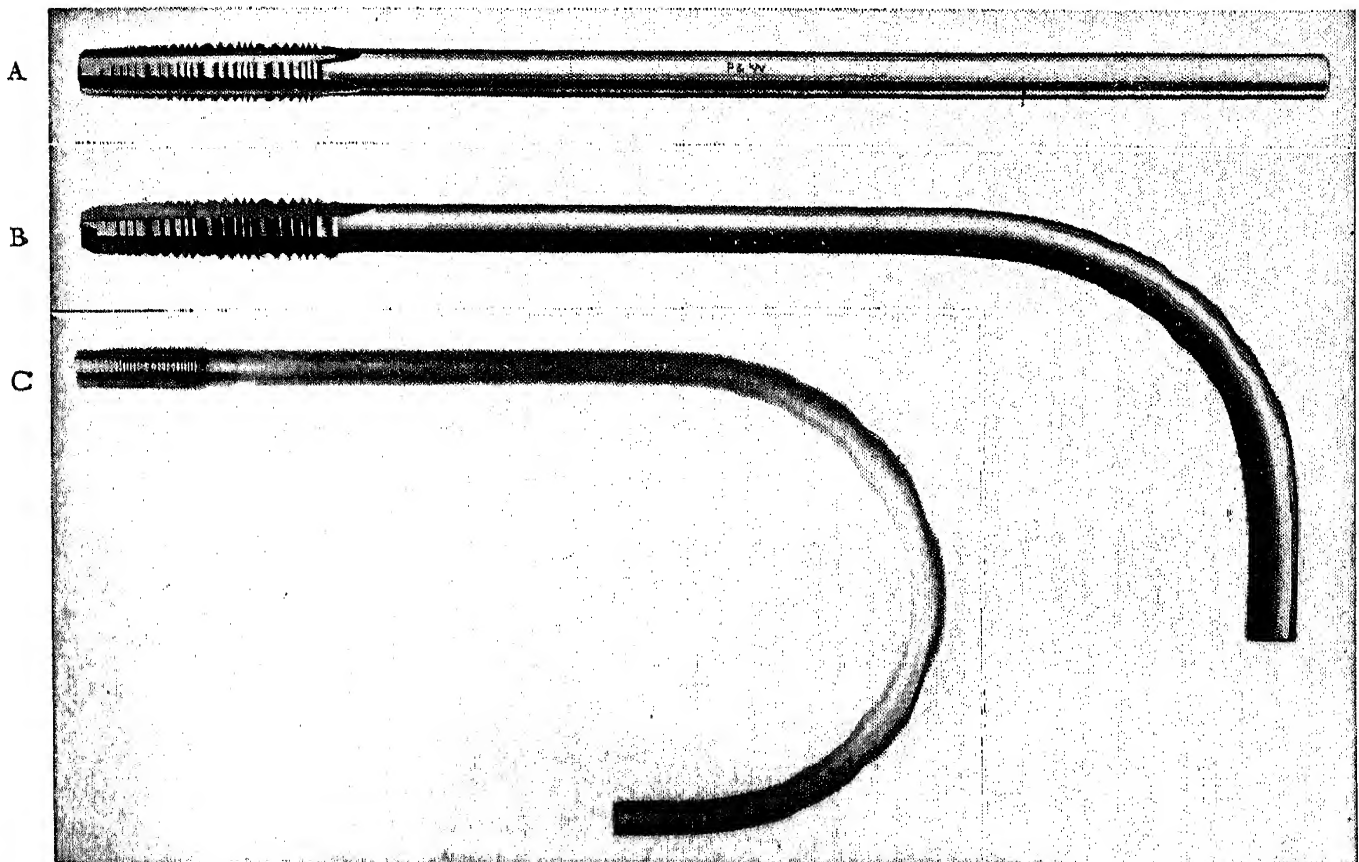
Taper taps. (top) Straight shank taper tap. (Pratt and Whitney Photo from Pratt and Whitney Division, Niles-Bement-Pond Co., W. Hartford, Conn.) (middle) Bent shank taper tap. (bottom) Hook shank taper tap. (Courtesy The National Machinery Co.)
